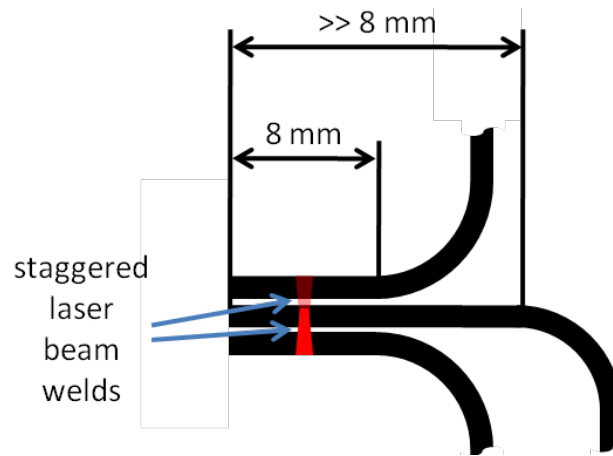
Flange set-up for a 3T laser beam weld
